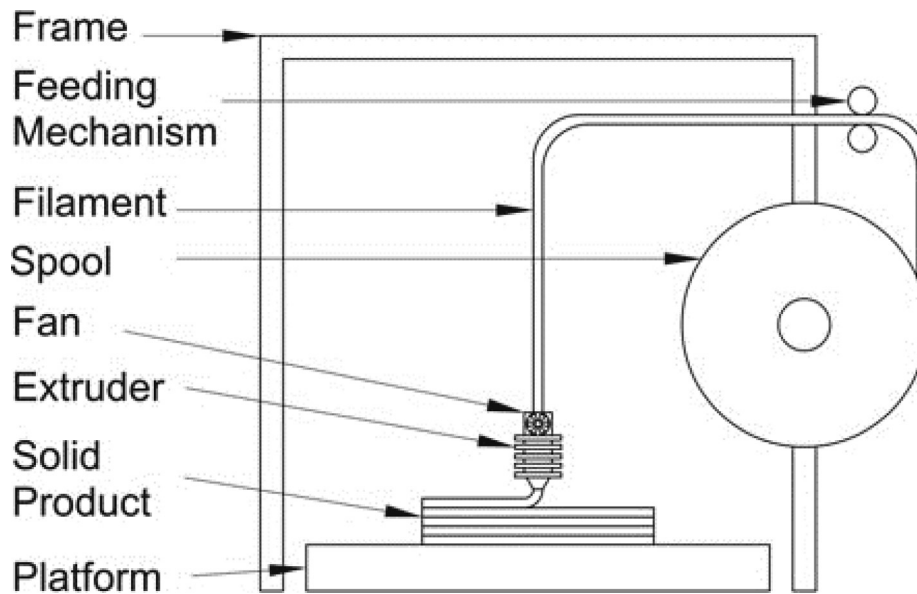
Parts of Fused Deposition Modelling technique [10]
